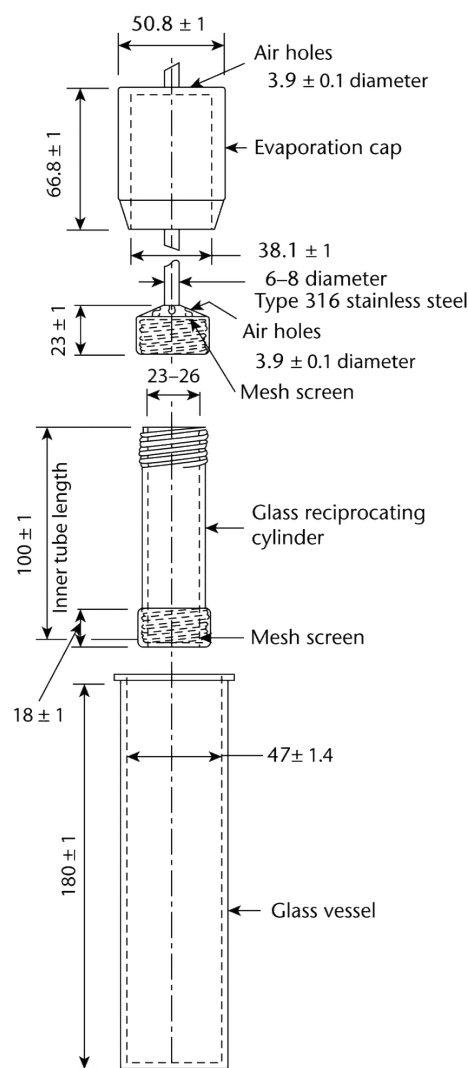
Apparatus 3 - reciprocating cylinder. All measurements are expressed in millimeters unless otherwise noted.
